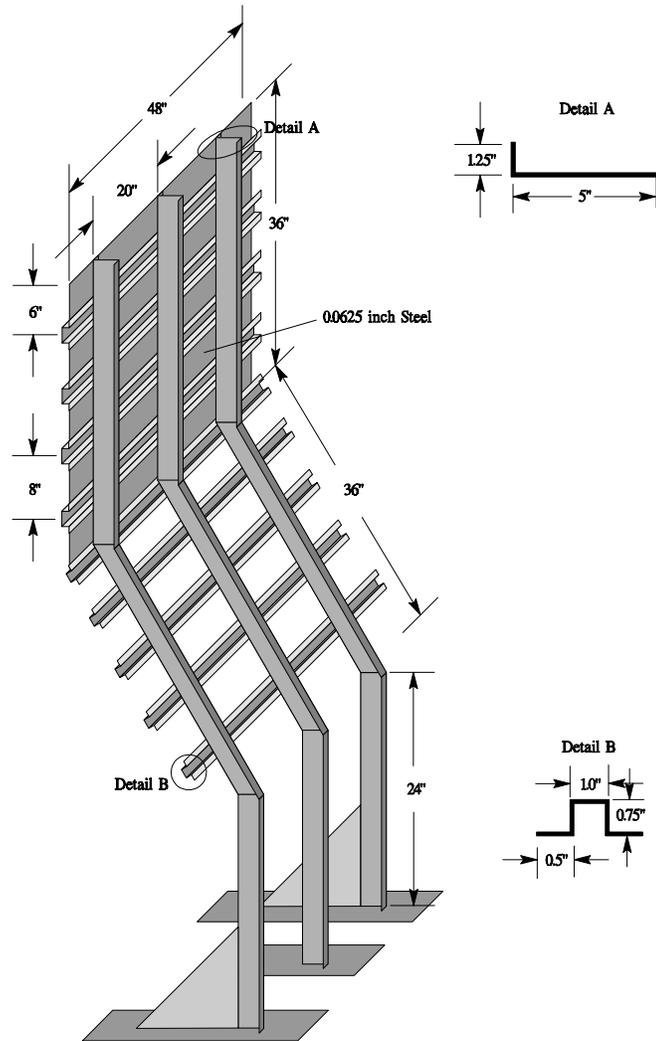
TEST RIG WITH LOWER STEEL PANEL REMOVED
